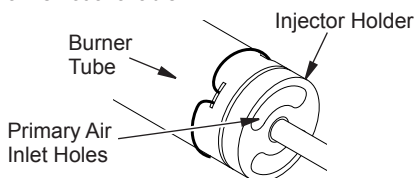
Injector Holder On Outlet Burner Tube - Rear Burner
